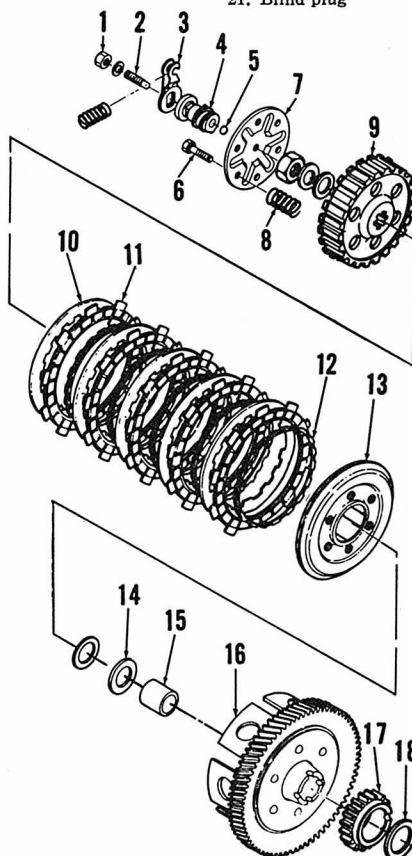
Exploded view of typical clutch assembly used in G6-S model. Unit used in other models is of similar construction.
